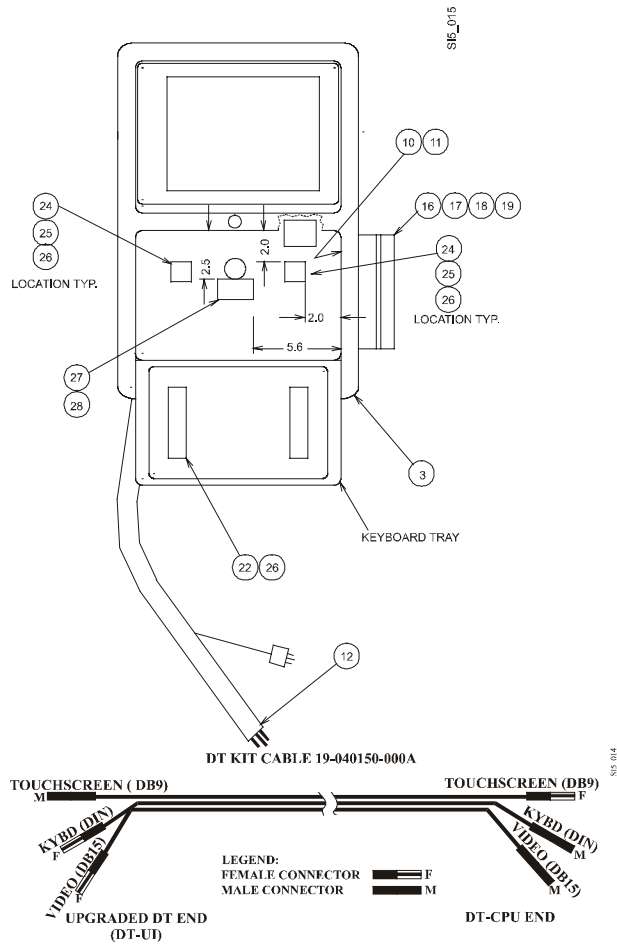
Earlier Version DT Internal Cable Layout and Assembly Identification
